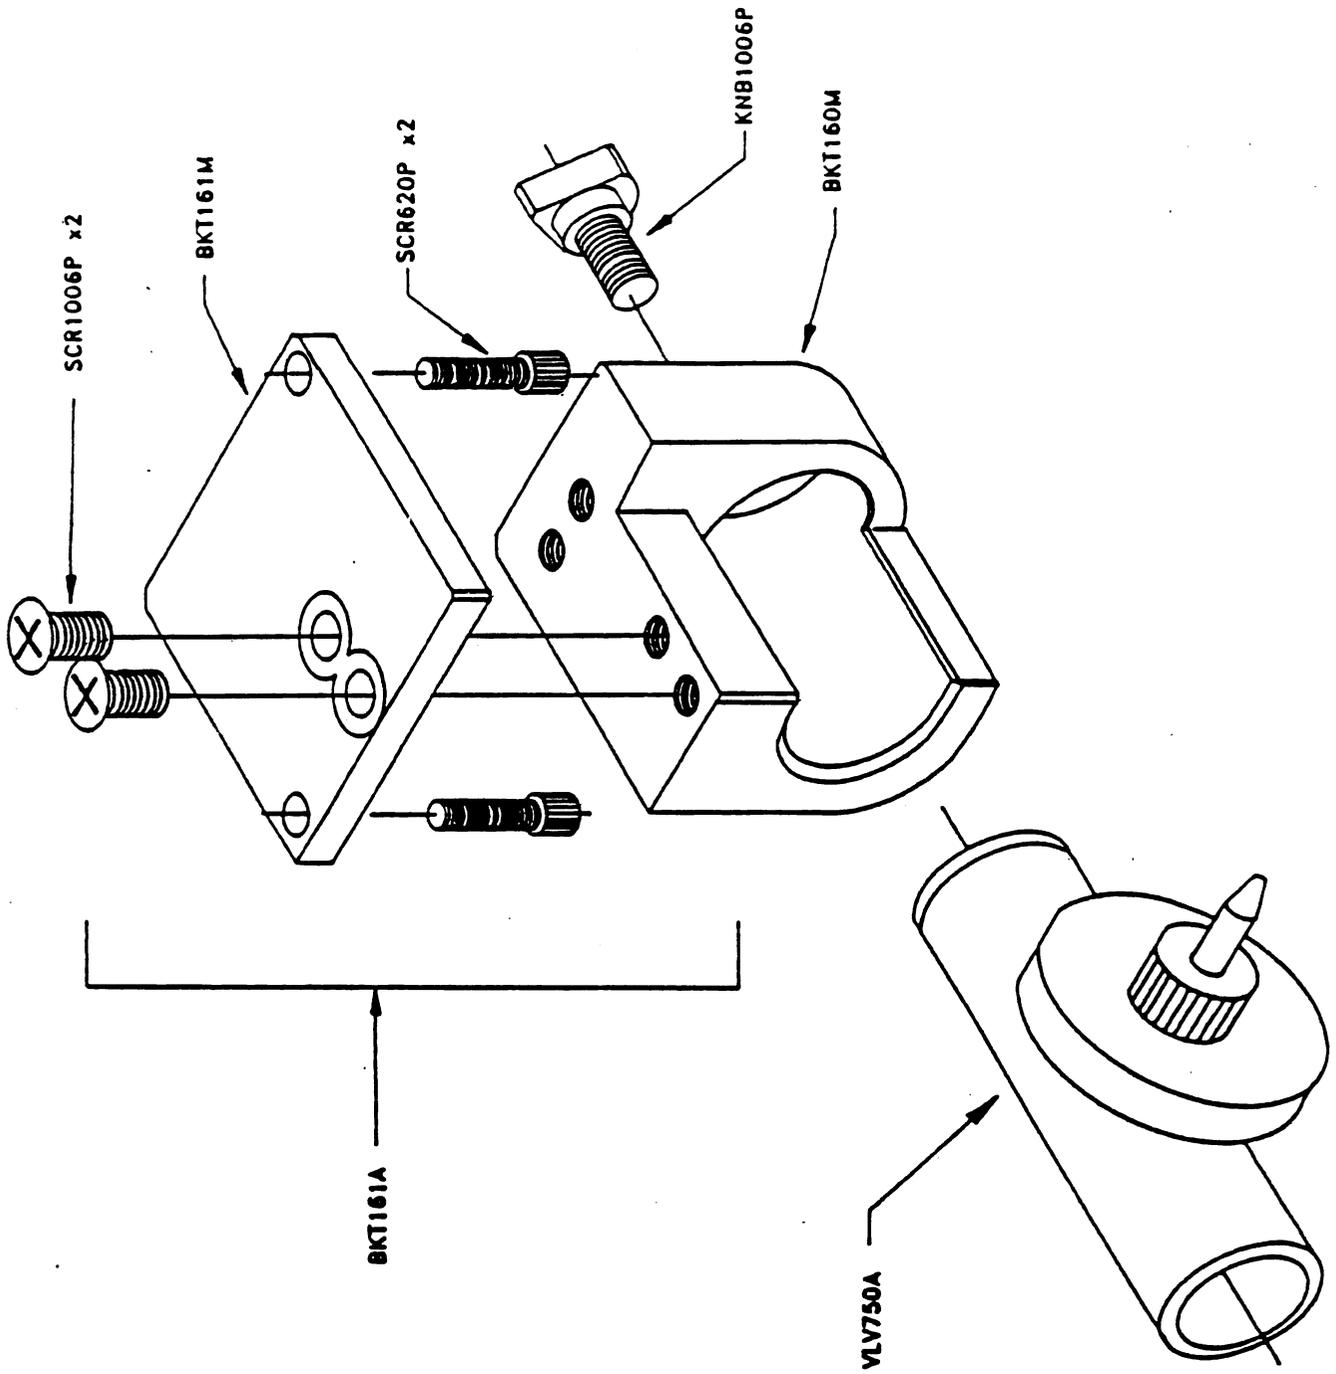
(b) PB Exhalation Valve Block Assembly
